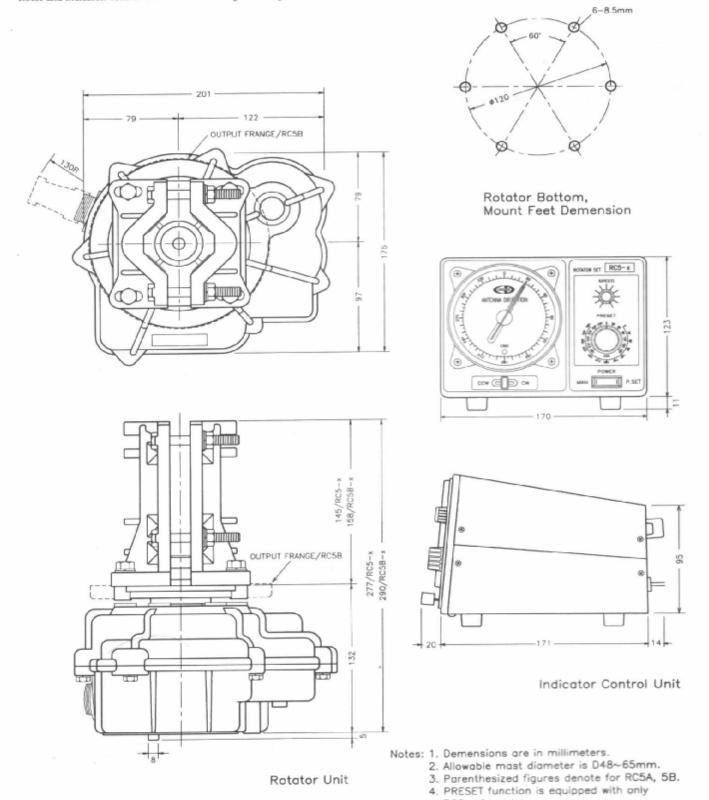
RC5x-x, Outline and Mounting Dimension
